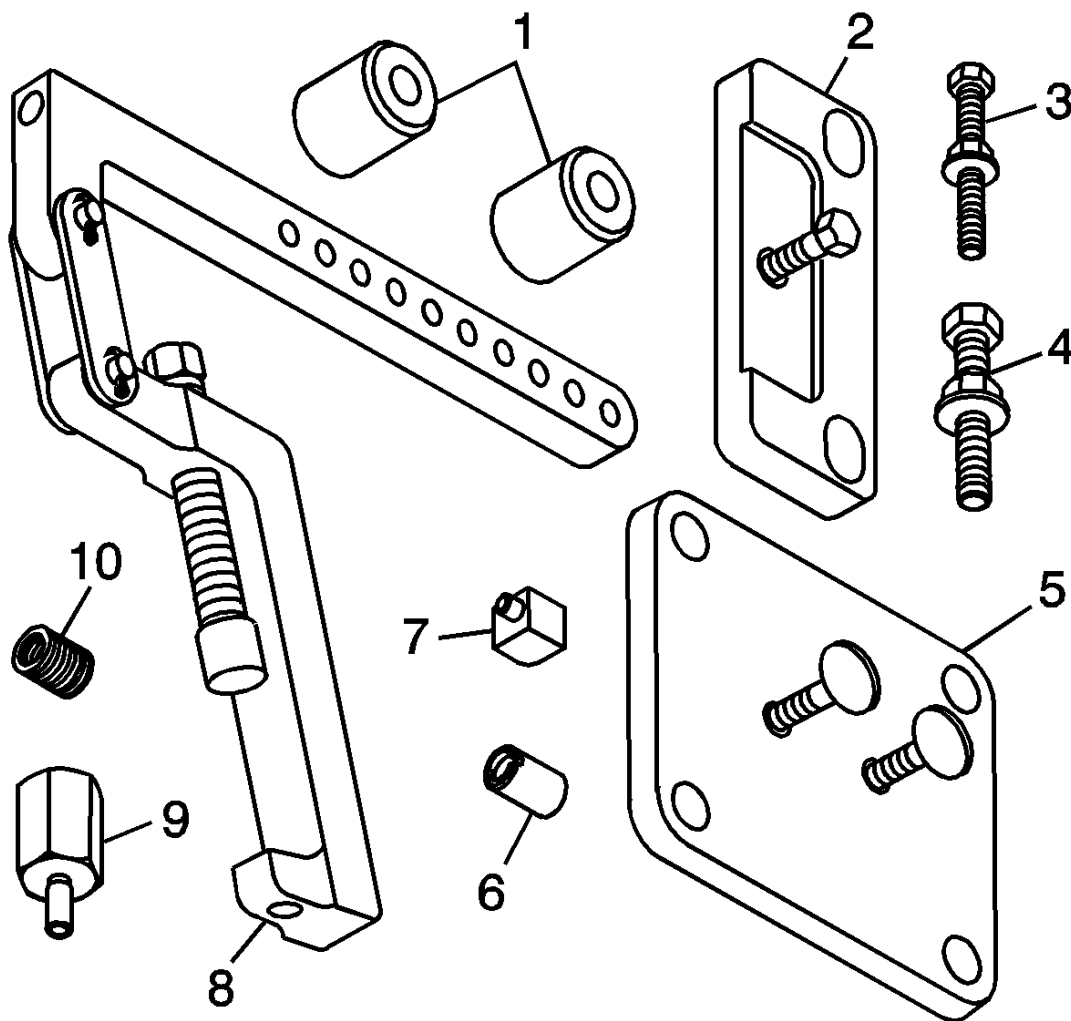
Identifying Rod Bearing Clearance Tool - Adapter Kit
